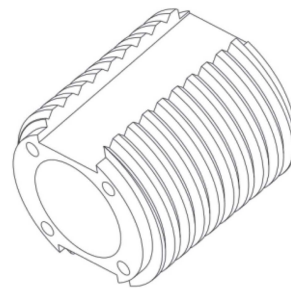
Drawing of the VAMAS-like mandrel with its 12-mm grooves.
